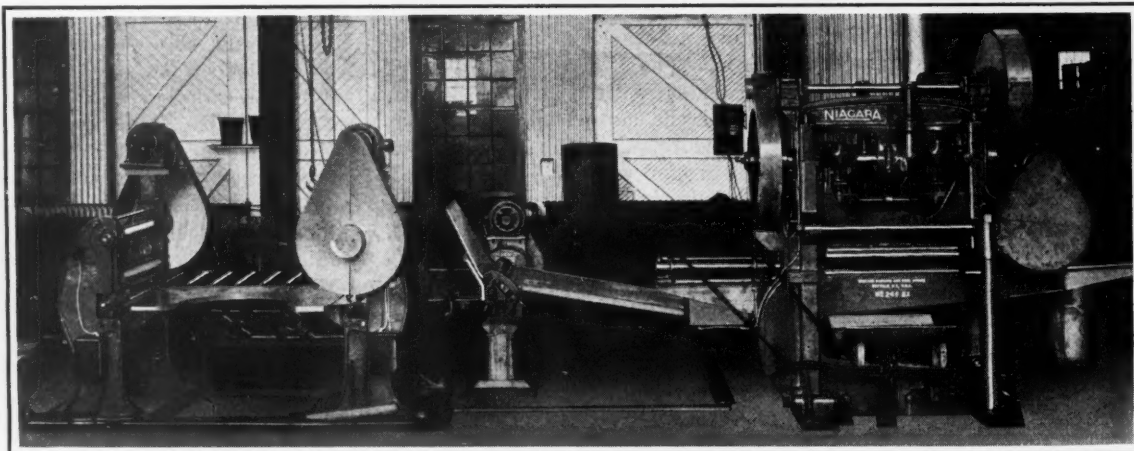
Equipment for Producing Drums with a Compound Side Seam
